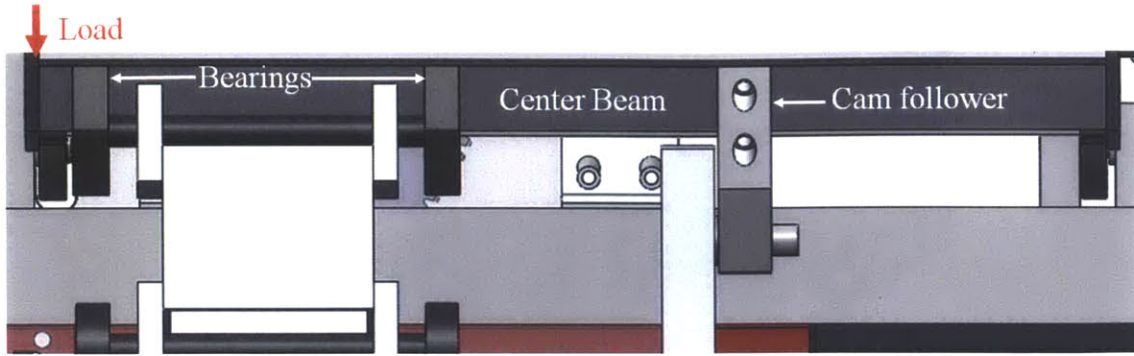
CAD: Center beam of the track assembly as seen from the rear
